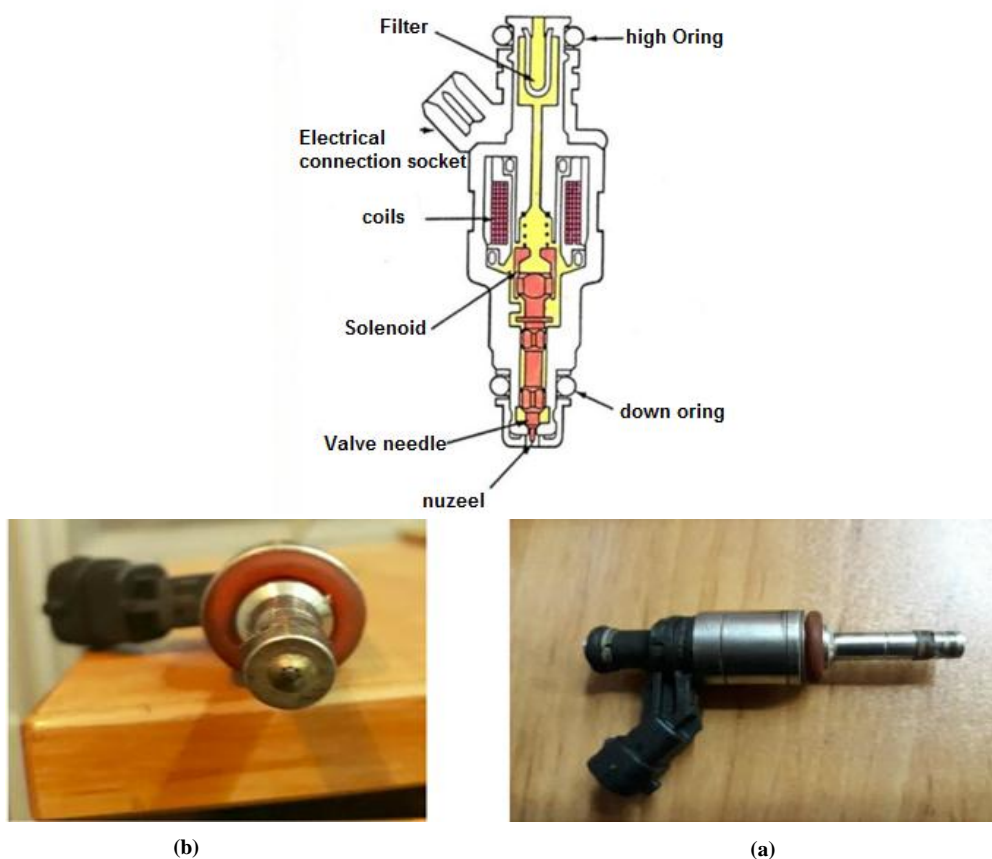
a) Two-dimensional figure of a six-hole direct injector with details and b) The actual shape of a six-hole direct injector with details for injecting methane gas into the chamber
